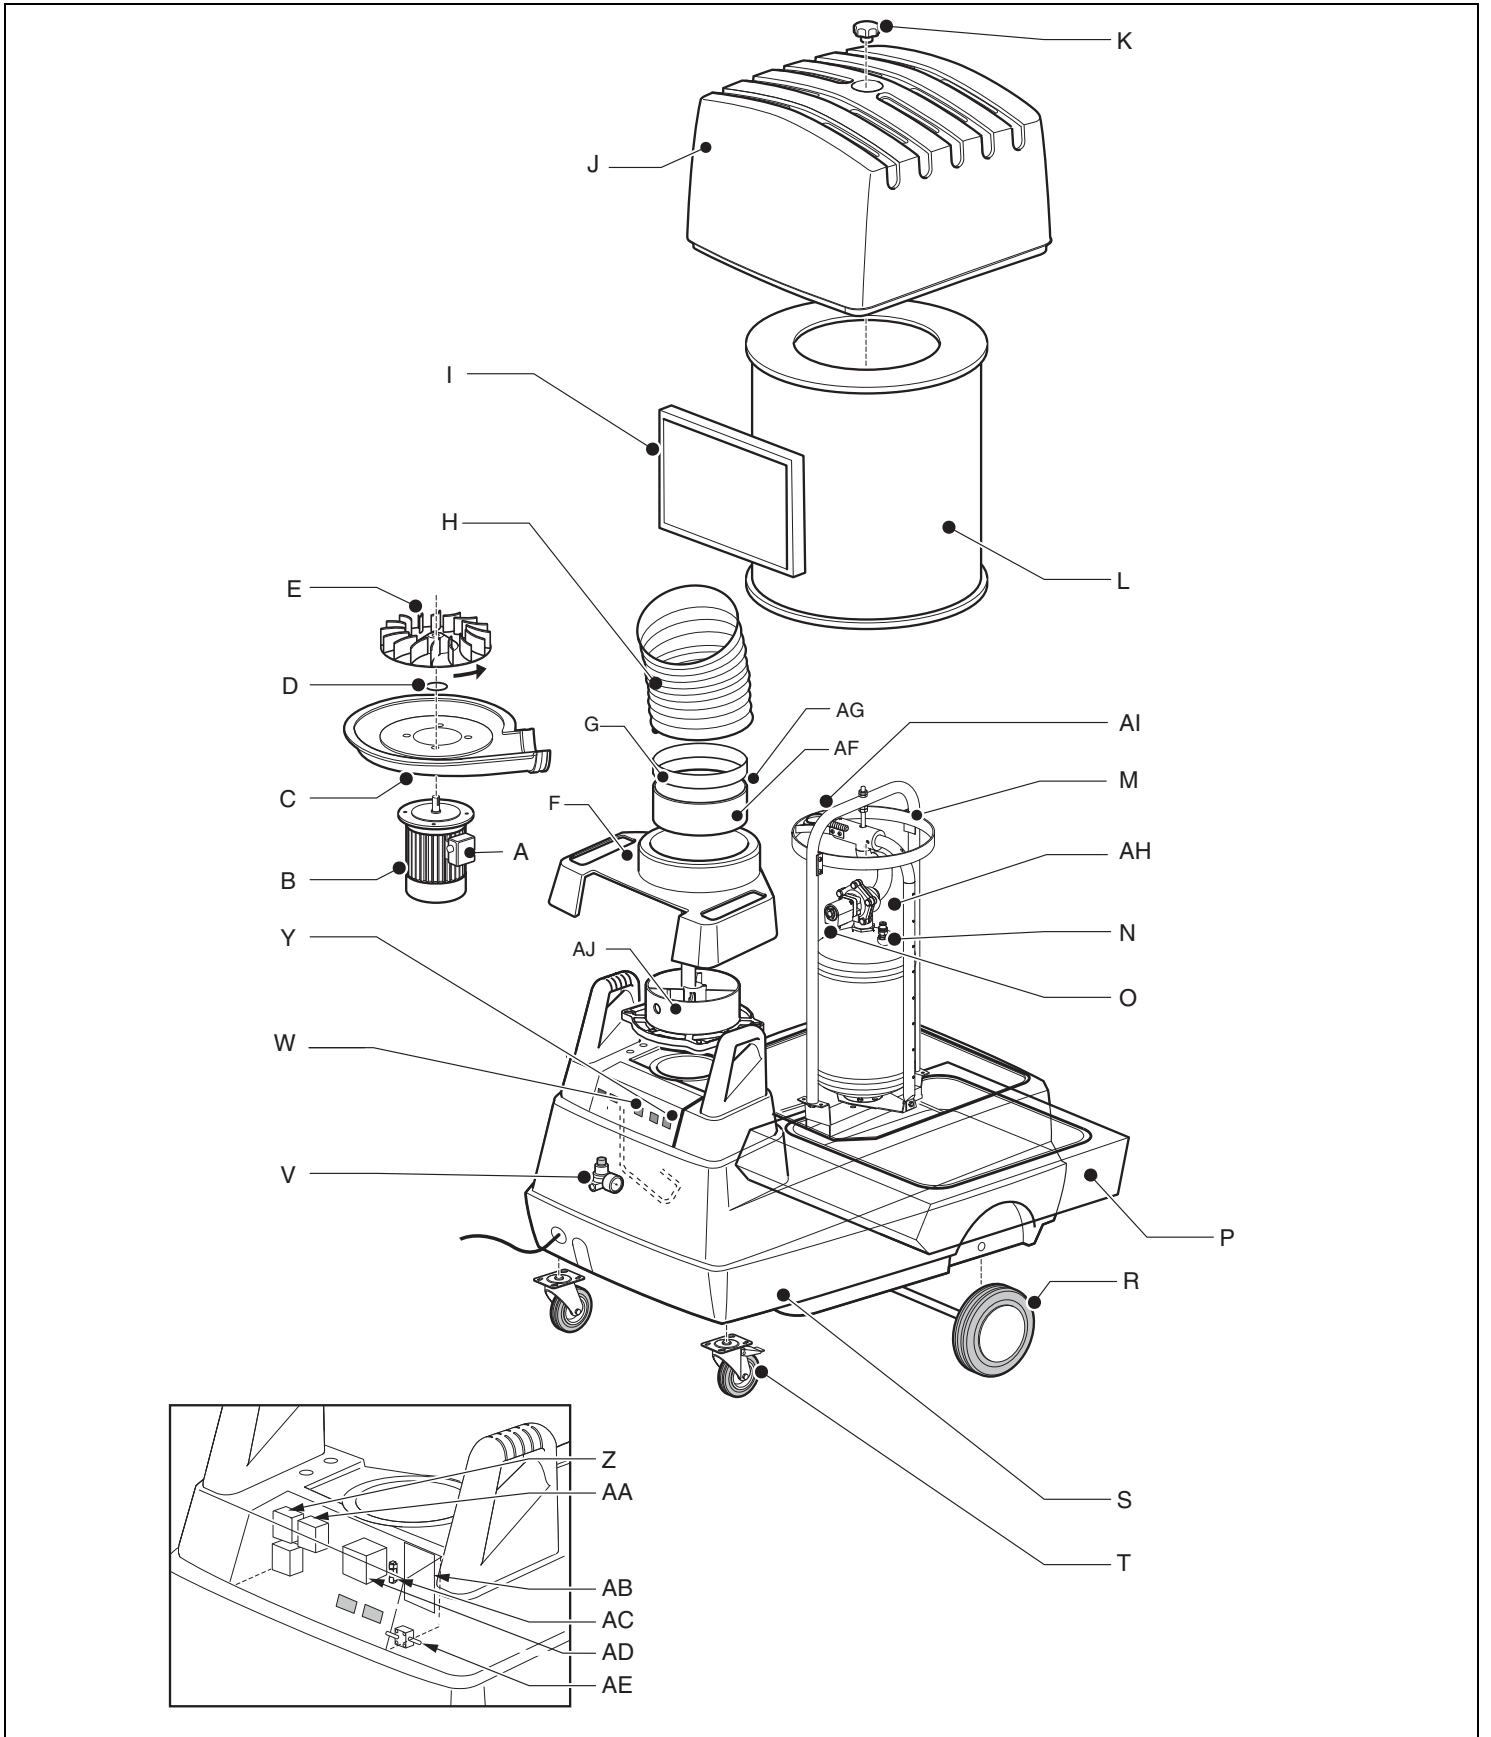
Exploded view Mobiflex 400-MS(/HE) Base Unit
